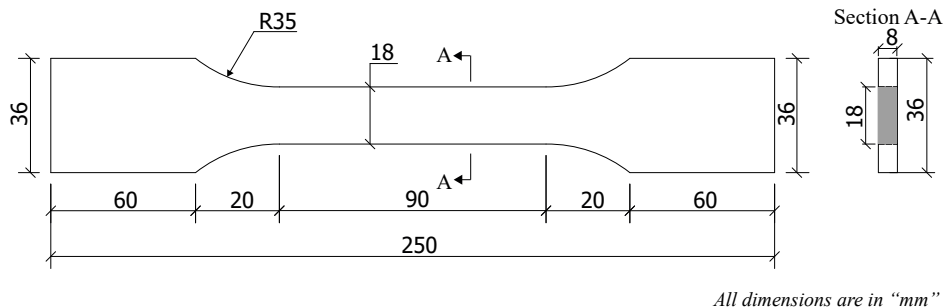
Technical drawing of rectangular steel coupons / SMIBC-E0/E1 test campaigns.
